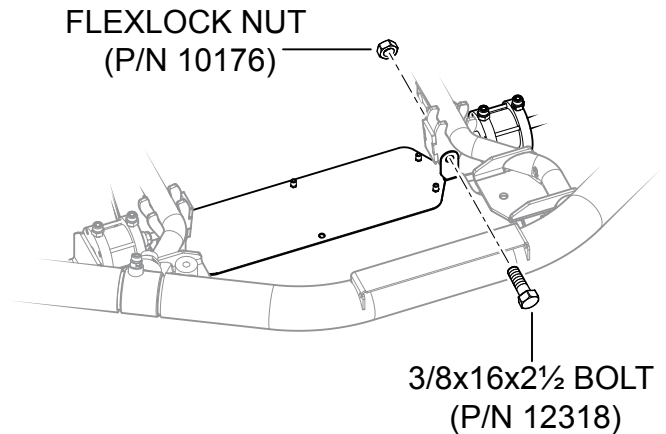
Reinstallation of Splash Guard Bracket with Steering Cylinders
